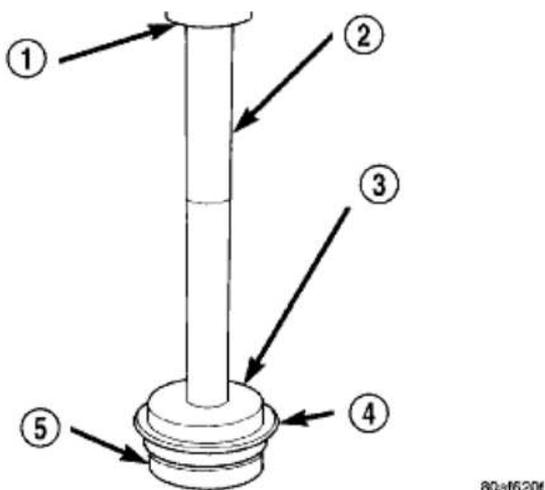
Installing Transfer Shaft Bearing Cup Into Retainer
